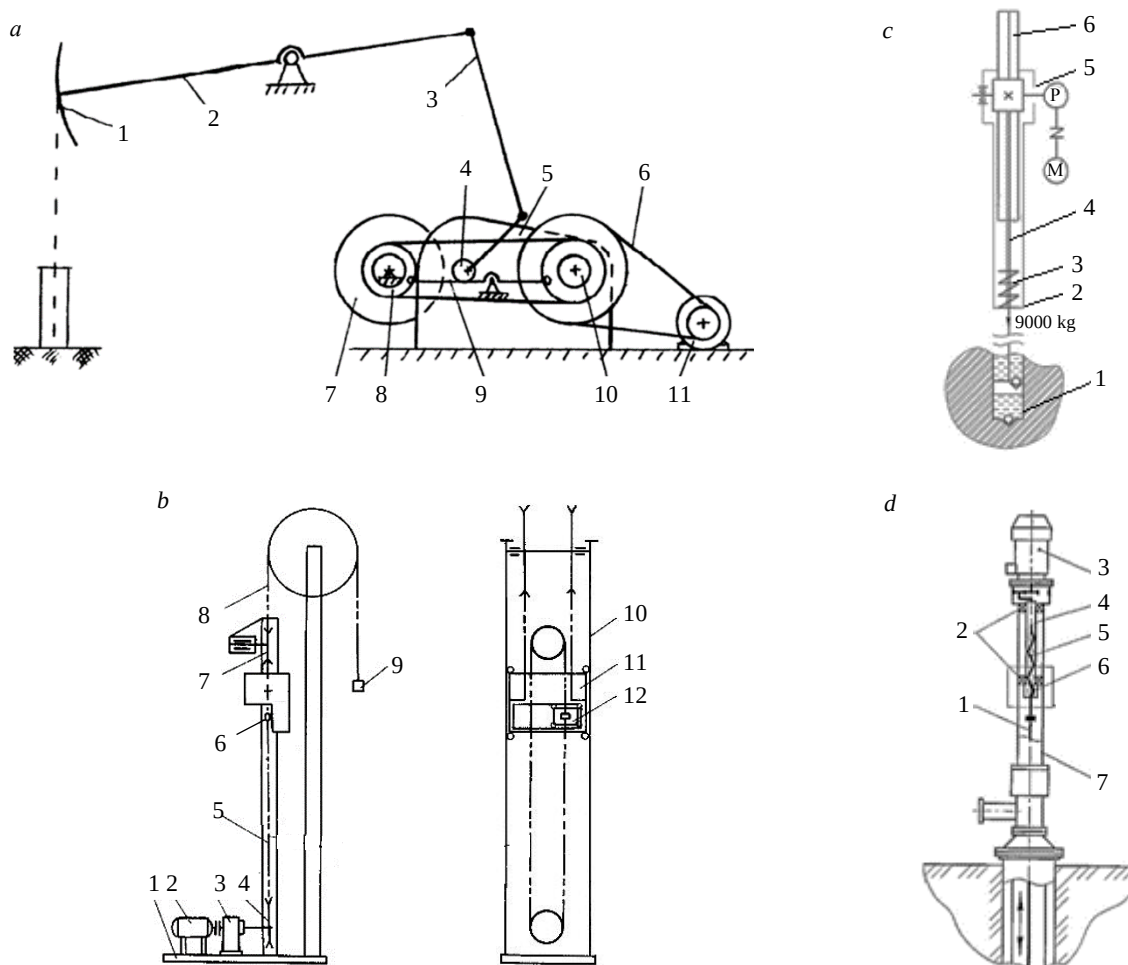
Kinematic scheme of a beam-balanced pumping unit (*a*), a drive with a movable carriage (*b*), a developed linear rack-and-gear (*c*), a drive with a lead screw without reversing the drive motor (*d*)
